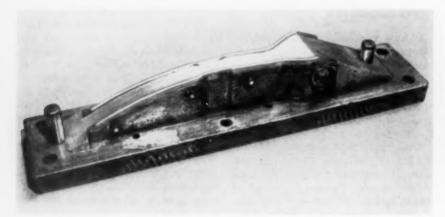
This steel male die, which is coated with parting agent, is used as the pattern from which to subsequently prepare the mating epoxy resin female die.
